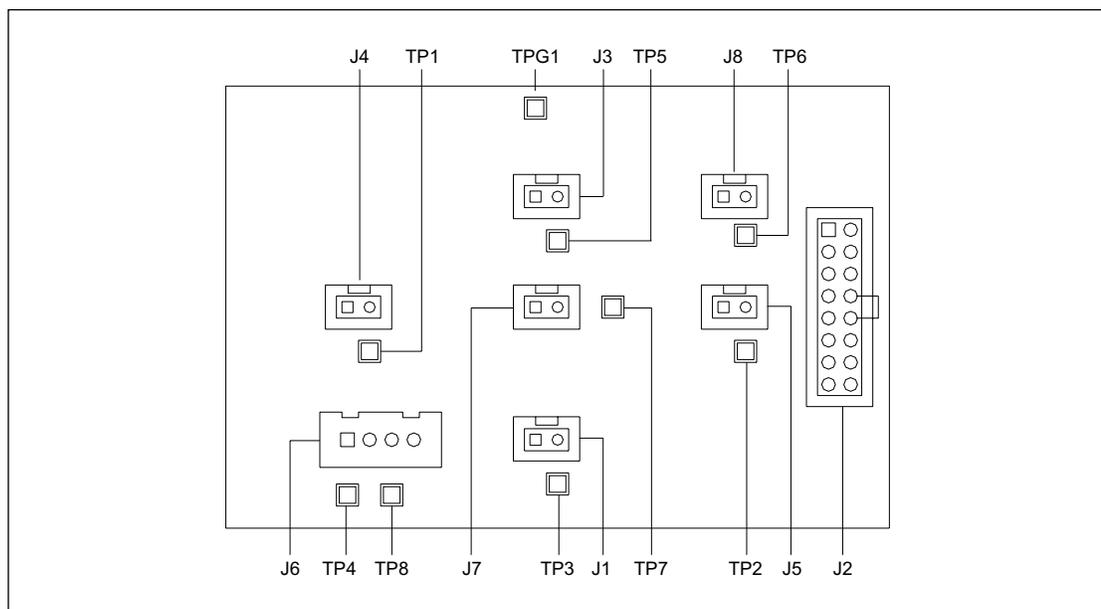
Cathode Connector Board Component Layout Diagram.
